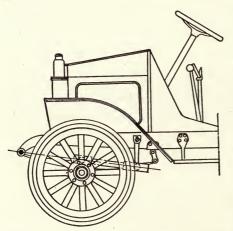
Steering Gear Back of Axle and Drag Link Parallel with Frame.
